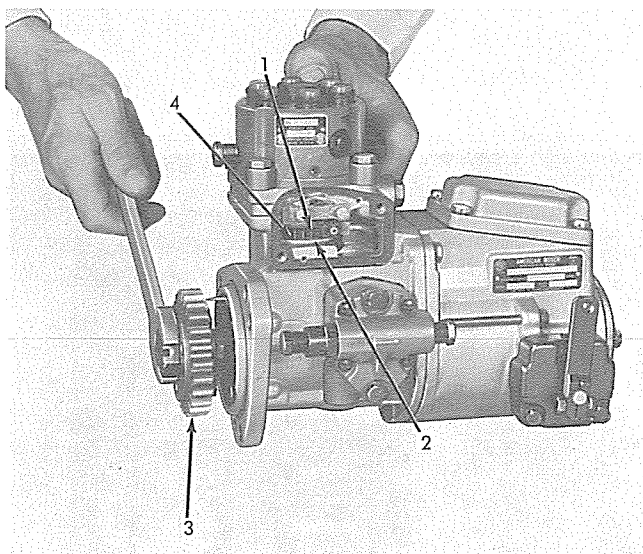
Plunger Drive Gear Positioned for Installation of Pump on Engine (T-27634)
